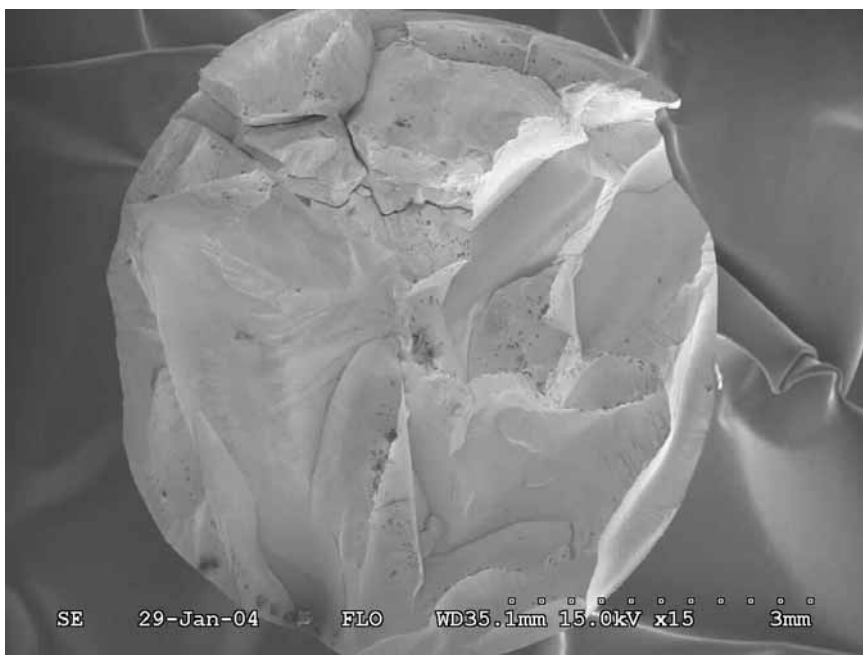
Overview of fracture surface (Kennametal Hertel)
